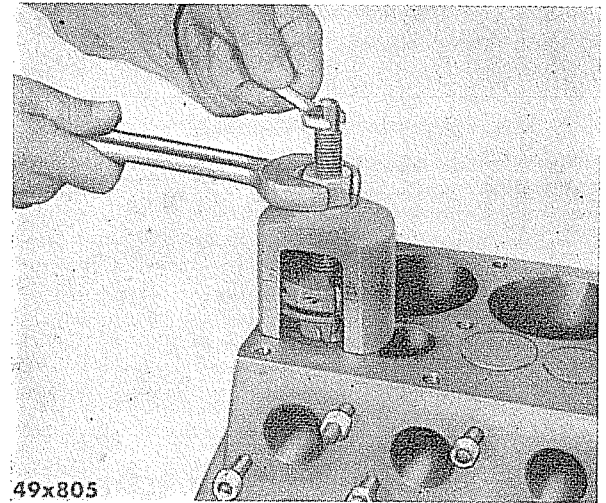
Removing Exhaust and Intake Valve Seat Inserts.
